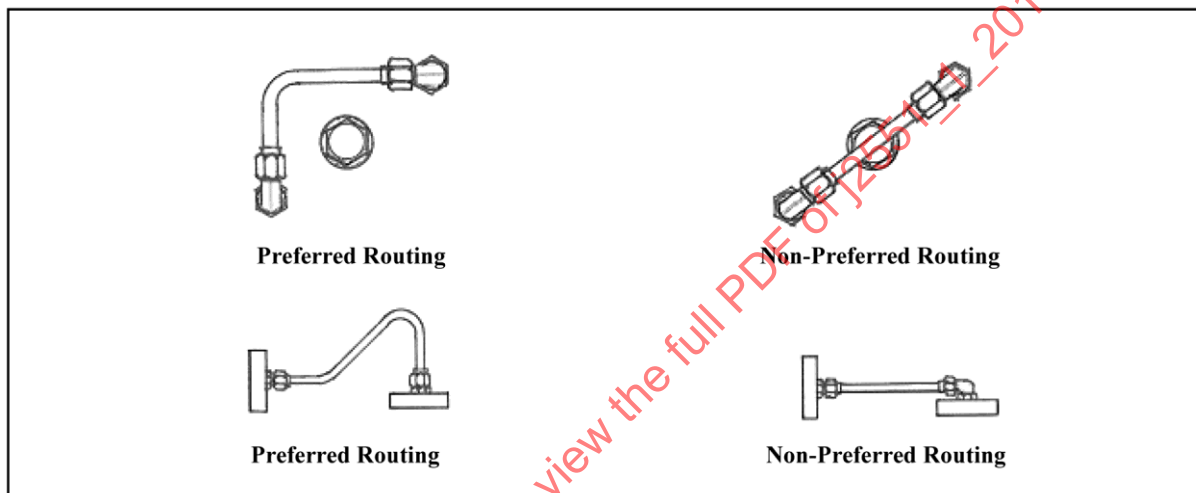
ROUTING BETWEEN FIXED POINTS
